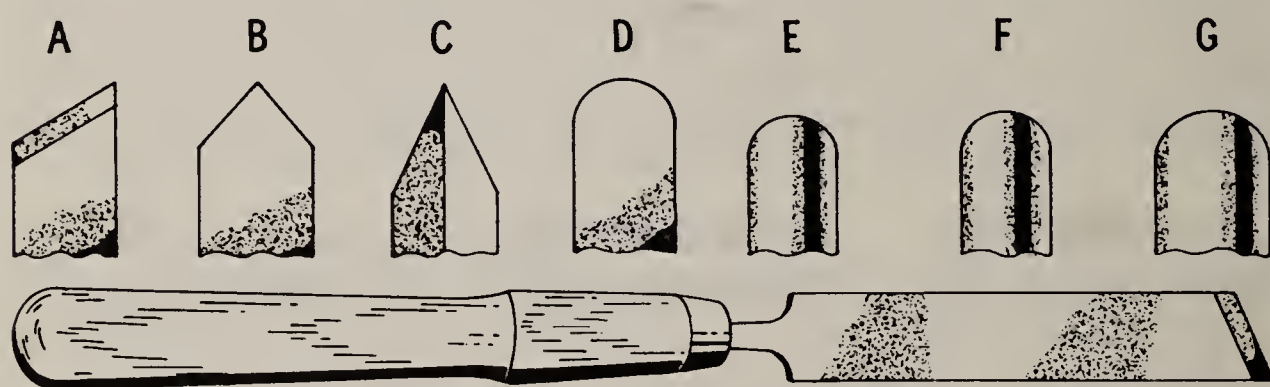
Typical woodturning lathe tools. In the illustration, A represents a skew-edge chisel; B, spear-point chisel; C, parting tool; D, round-nose tool; E, F and G, gouges.
